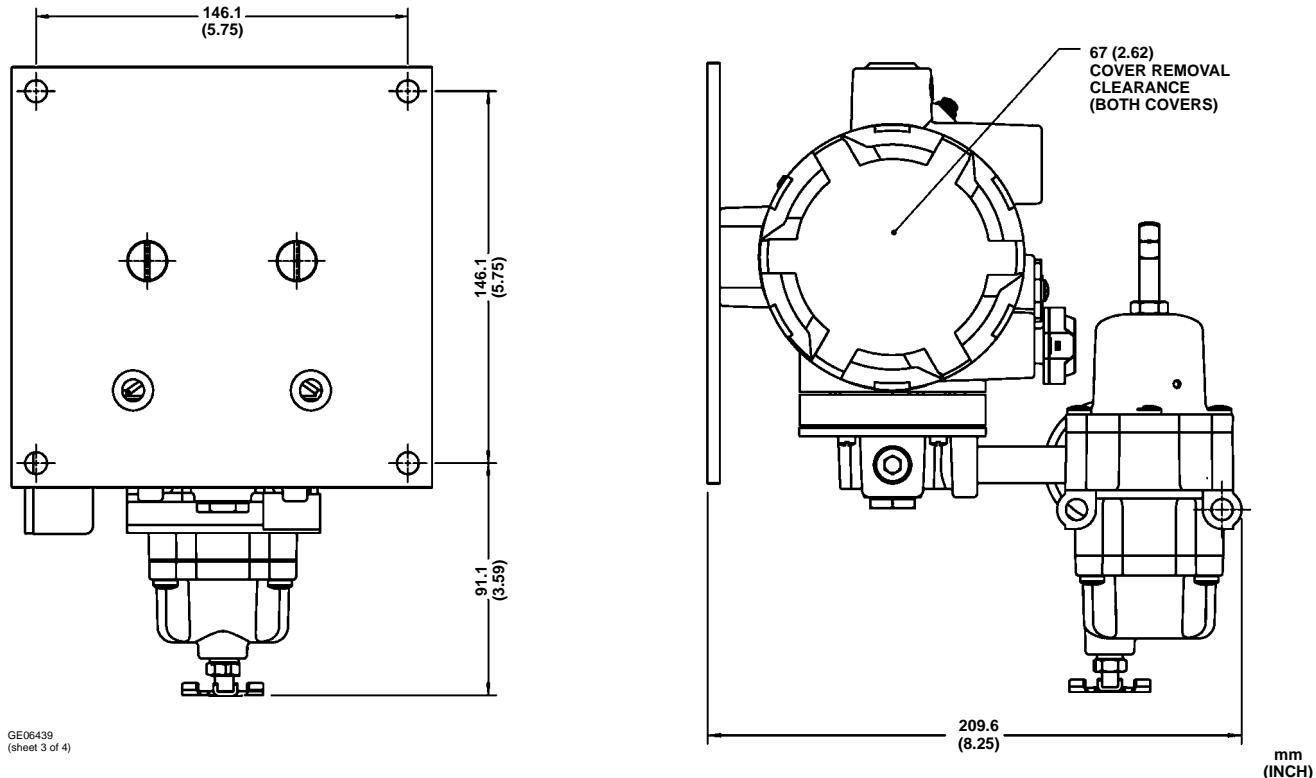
Dimensions with Optional Fisher 67 Filter-Regulator (Surface/Wall Mounted)
